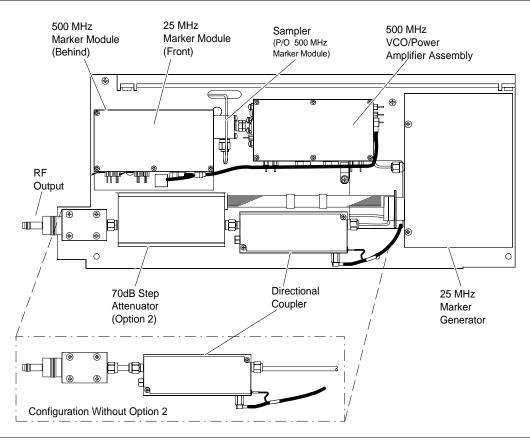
Models 54177A RF Deck Parts Location (External Side Detail)
